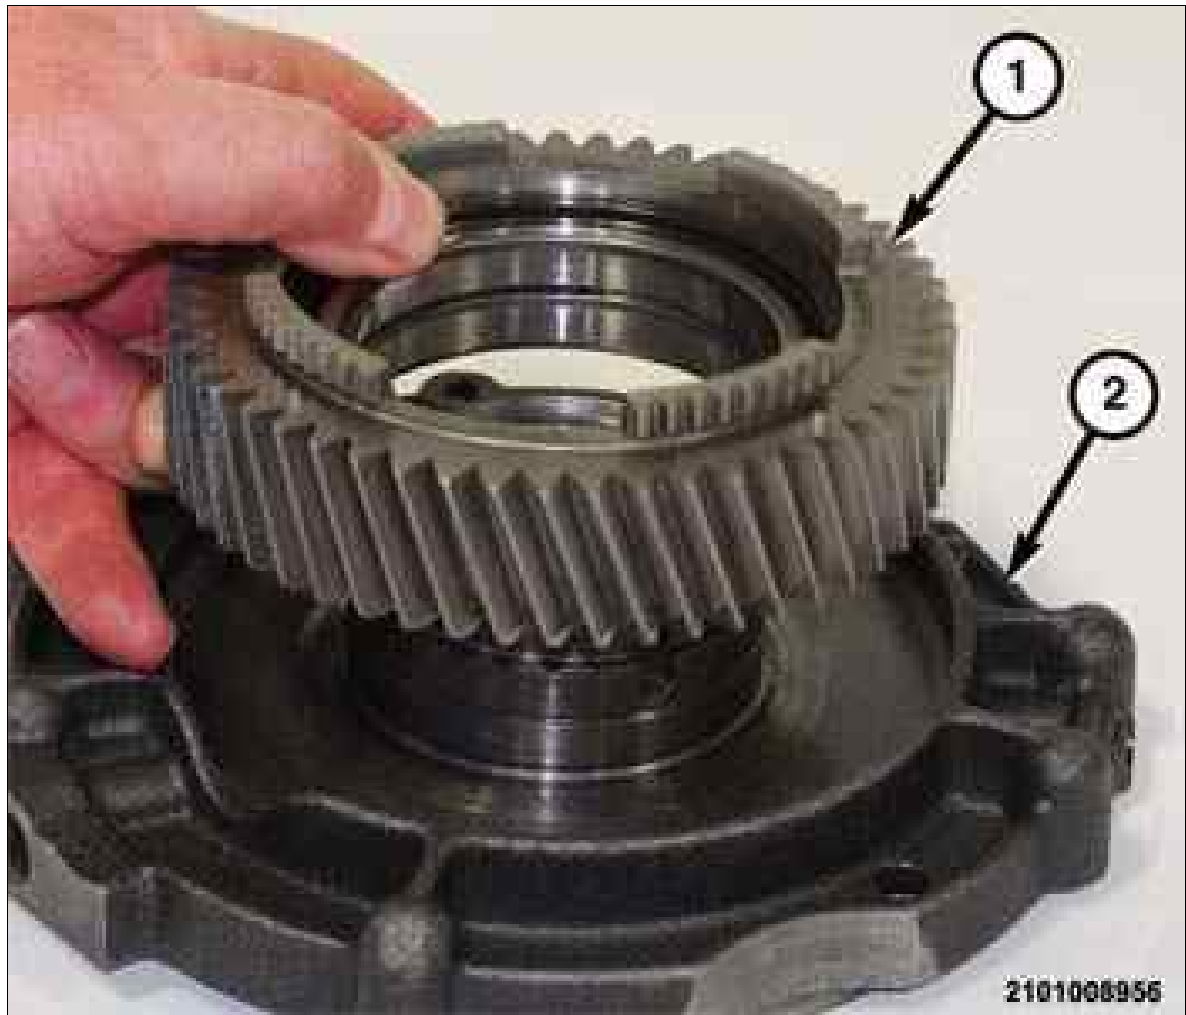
Installing Dog F-Clutch Thrust Plate Into Output Gear Support Hub
